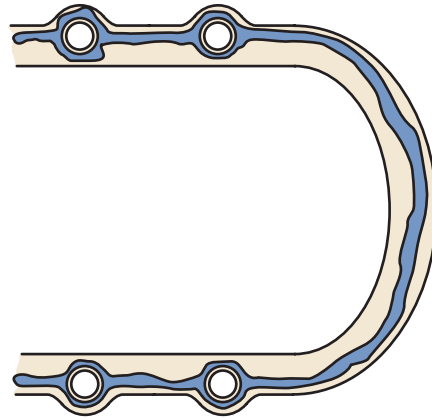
When applying RTV, make sure the bolt holes are encircled.
